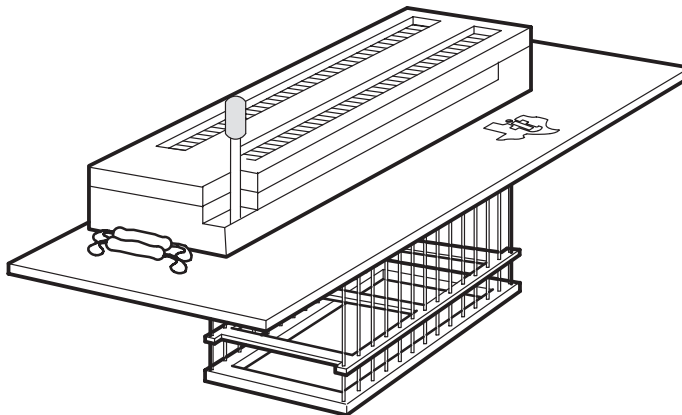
EPROM Adapter Socket (40-Pin to 28-Pin DIP Conversion)
